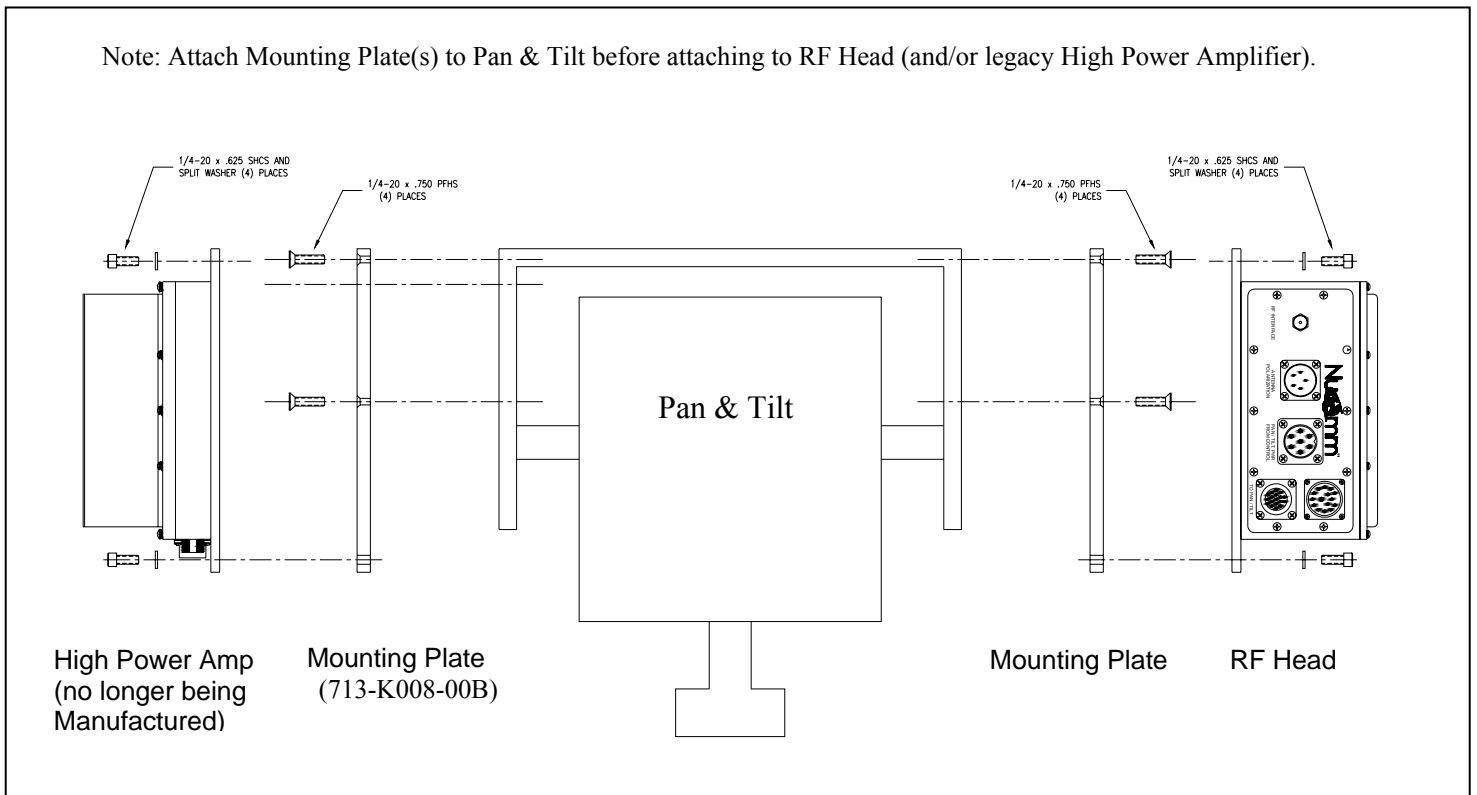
Mounting RF Head (and legacy HPA) using Mounting Plate
